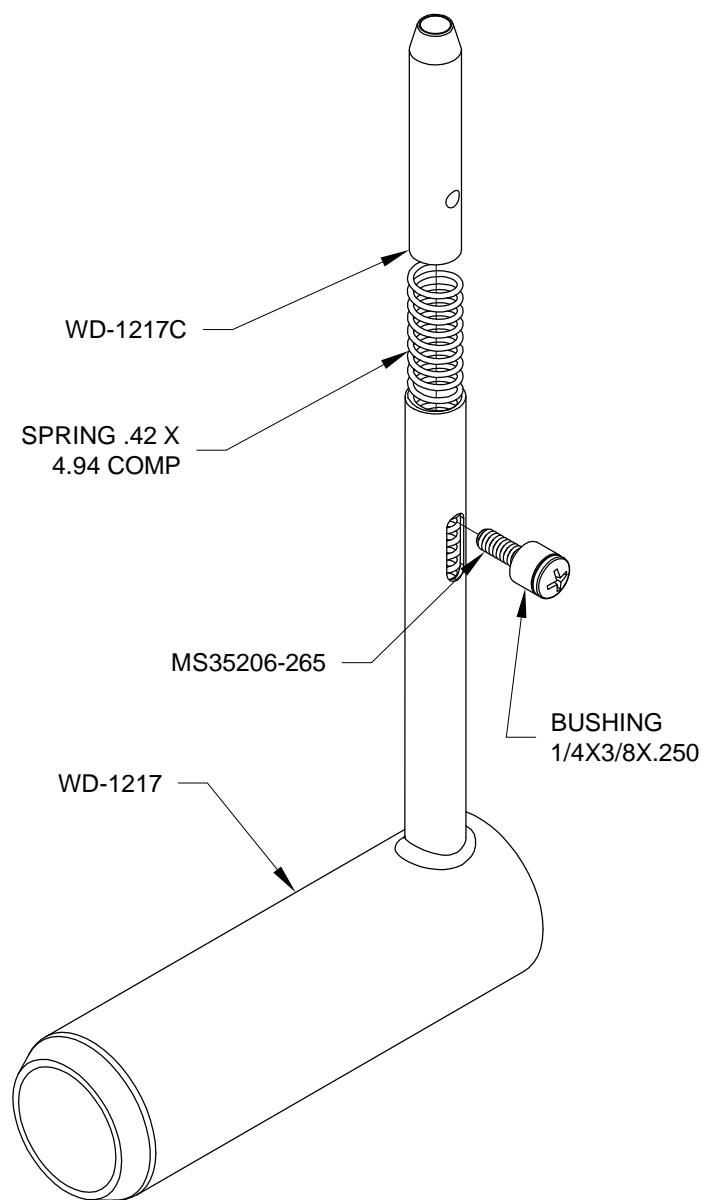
FUSELAGE PIN ASSEMBLY (RIGHT SHOWN)
